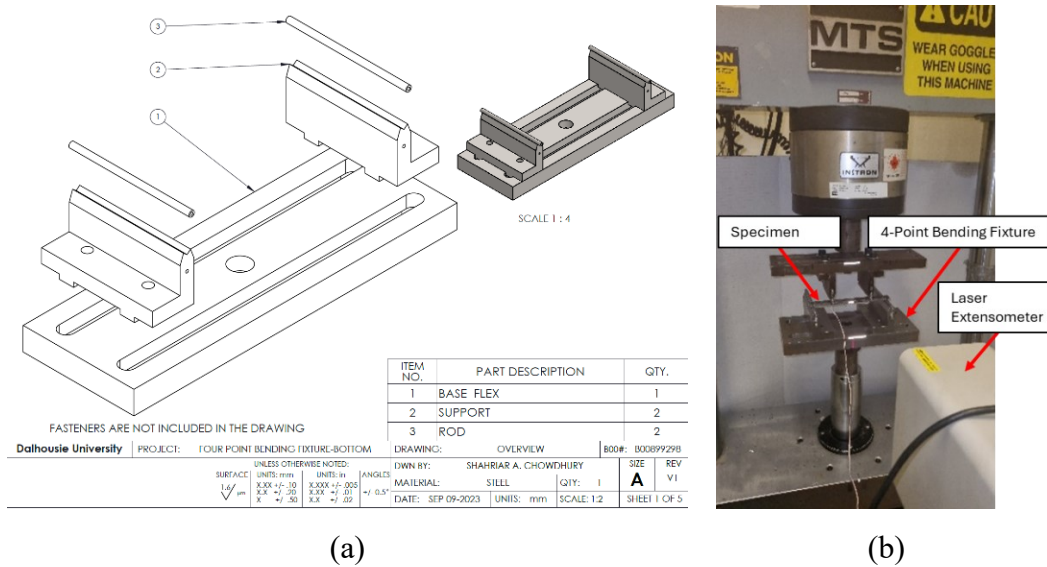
(a) Schematics of the Four-point bending test fixture and (b) test setup.
